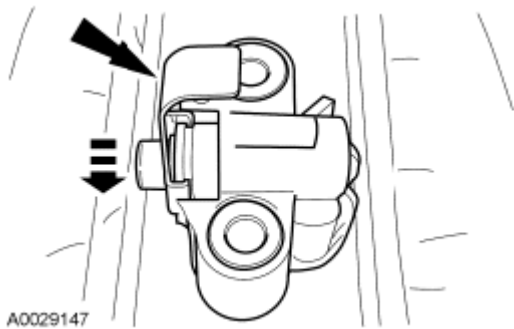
Installing Hydraulic Chain Tensioner Retaining Clip On Tensioner
